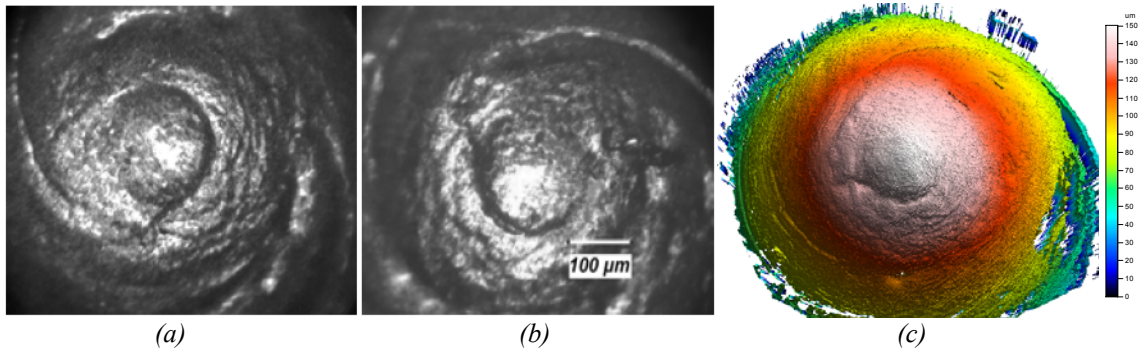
Micrographs for TD coated SKD 11 die sample (Sample # 10-1) contact surface (a) before test, (b) after test, (c) 3-d view of contact surface after the test using confocal microscopy
